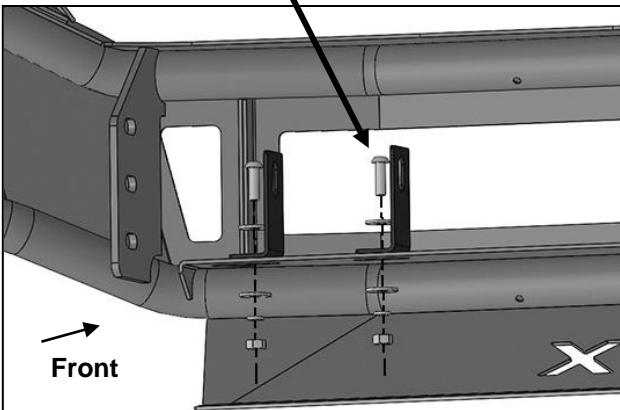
Passenger/Right Mounting Bracket attach to the mounting location
